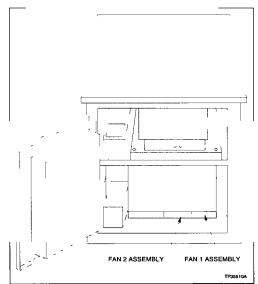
4. Fan Assembly Removal for IIOIS40/IIOIC402 Consoles
